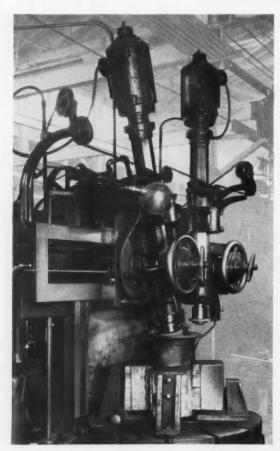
Boring mill adapted to vertical chucking grinder work by attachment made by Standard Electrical Tool Co.
